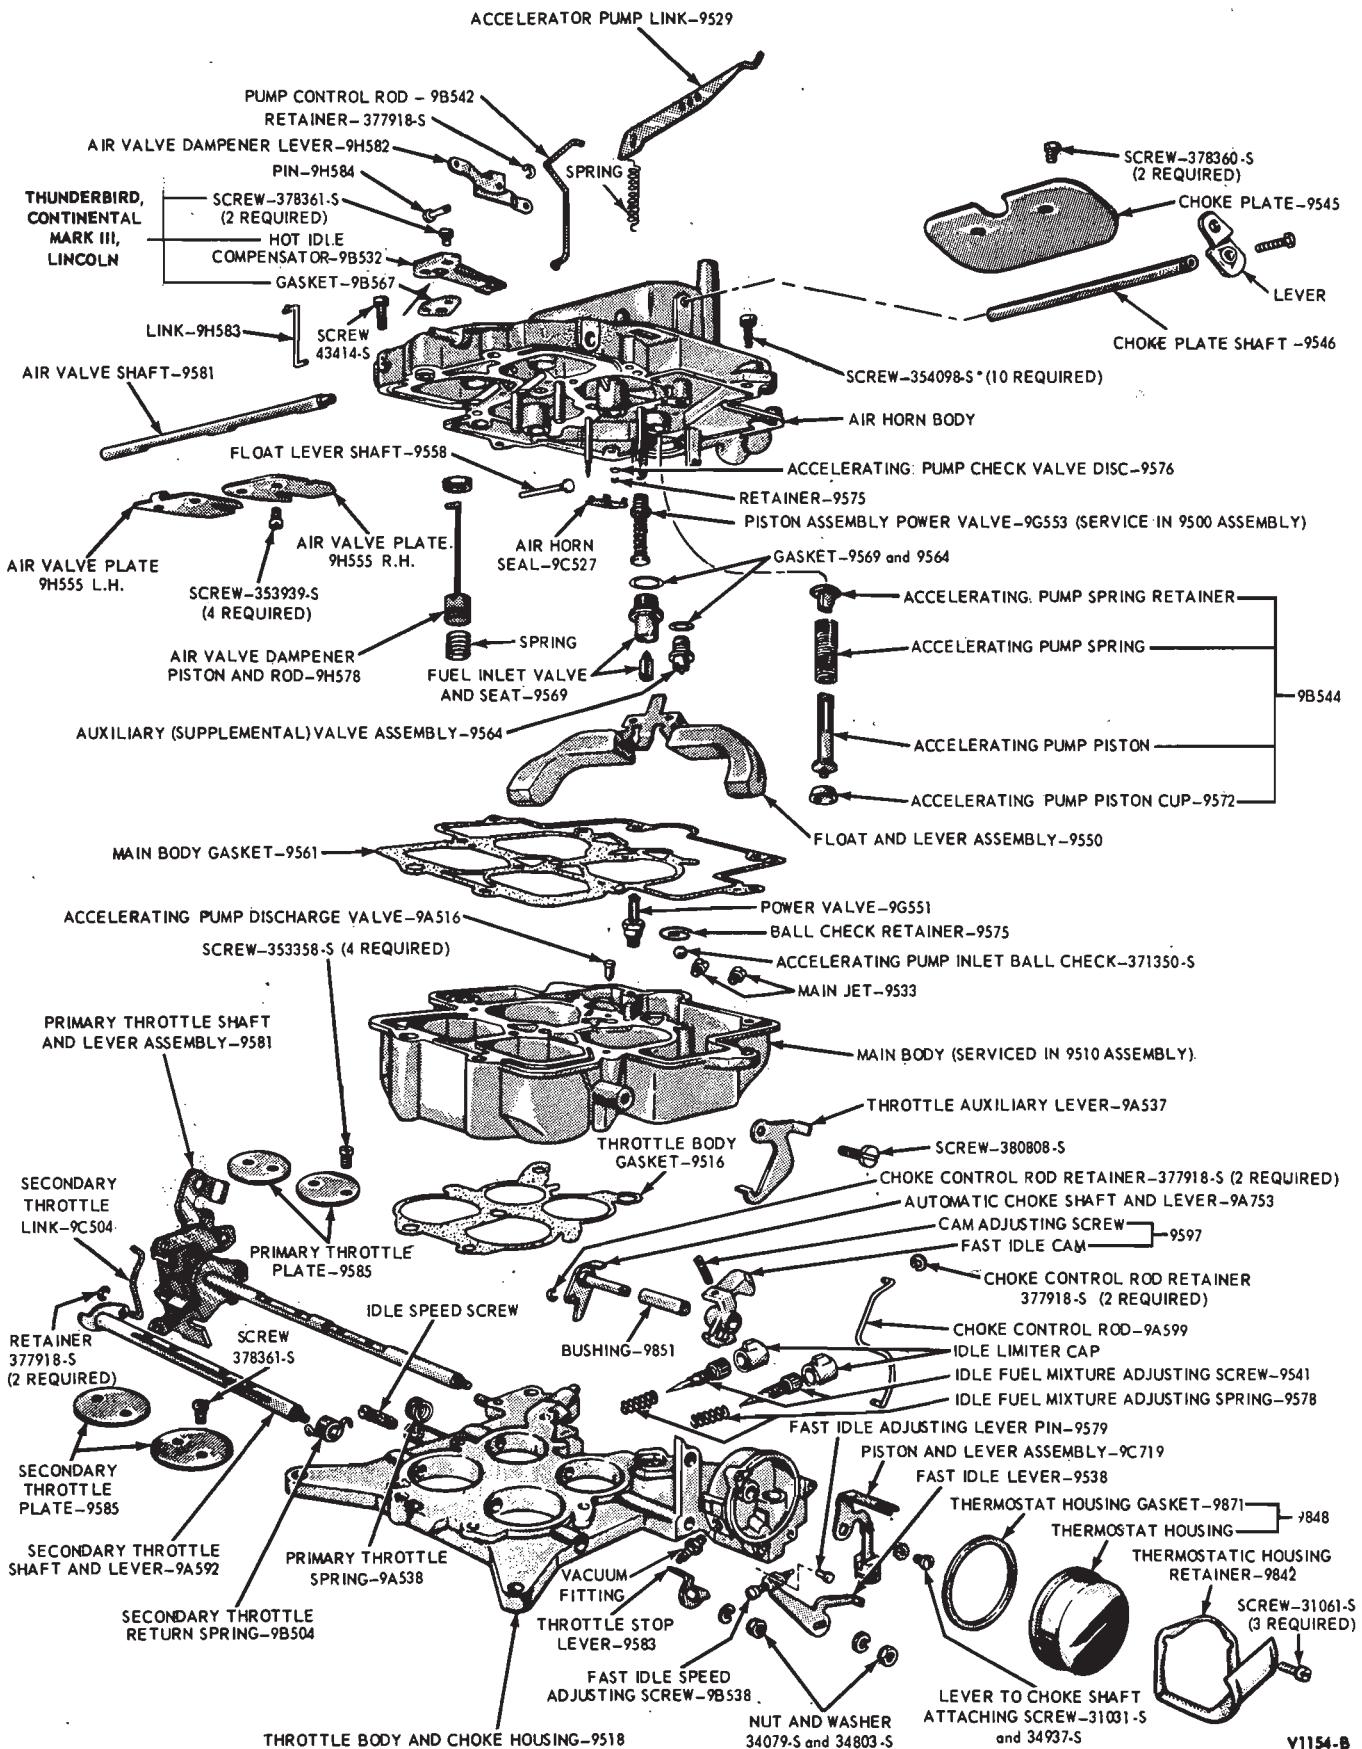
Autolite Model 4300 4-V Carburetor Assembly
